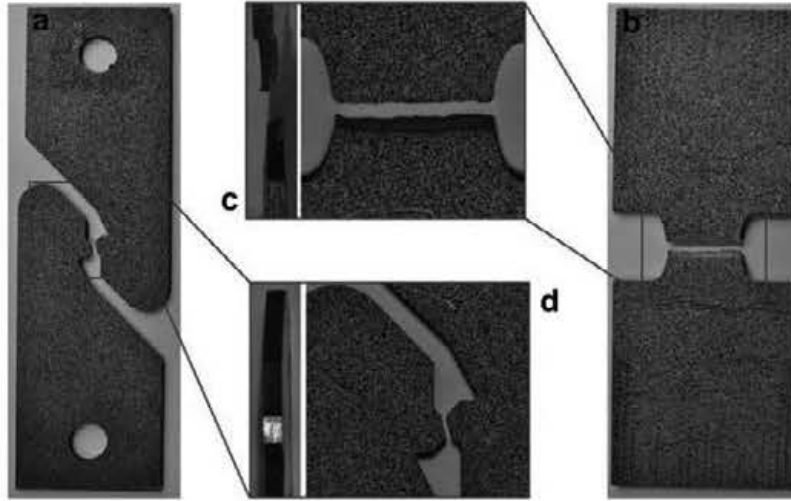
Plane specimens painted with a speckle pattern. (a) Shear and (b) plane strain specimens after fracture. (c,d) show in detail the fracture area of plane strain and shear specimens, respectively.
